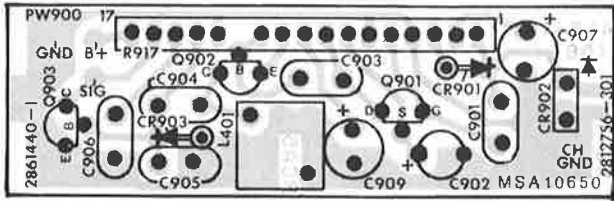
PW 900 Circuit Board Assembly (SJT 300)
